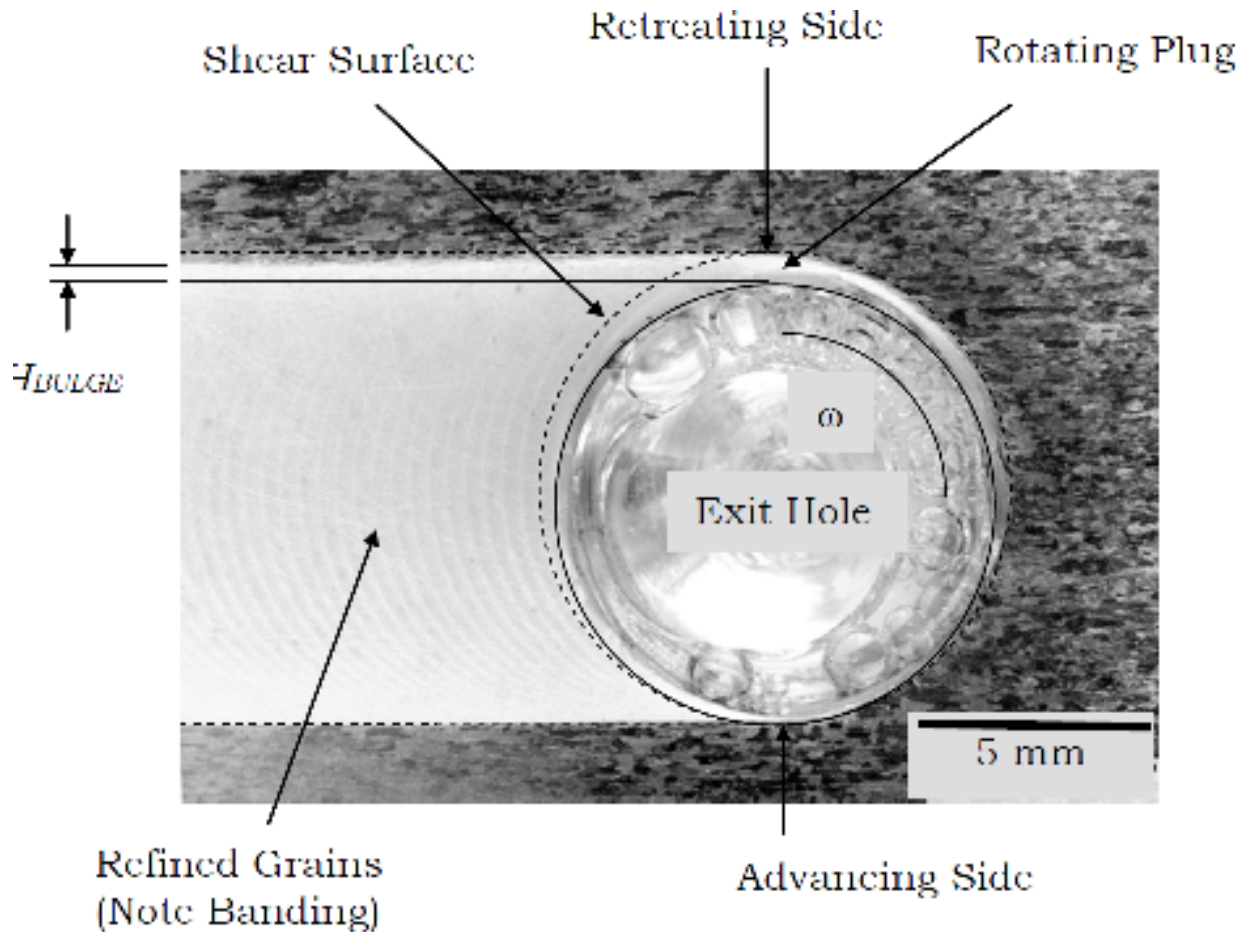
Plan view of FSW weld with regions of interest labeled [102]
